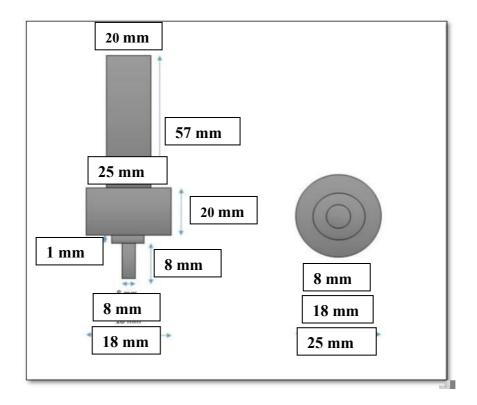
Tool geometry with two shoulders and a cylindrical pin profile
